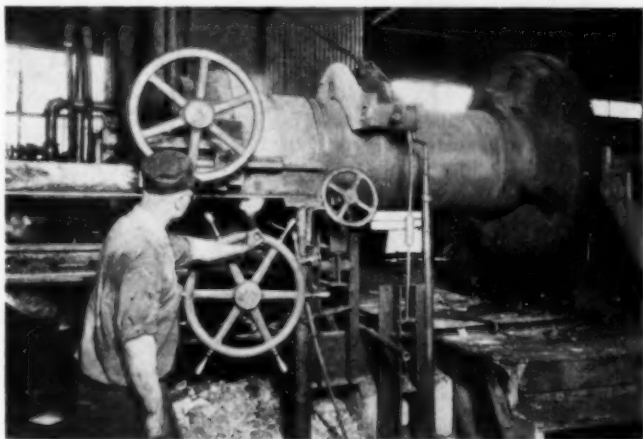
Inspector, Representing Bureau of Explosives, Putting 500-Lb. Hydrostatic Test on Completed 1-Ton Container, Using Stürcke Testing Machine
